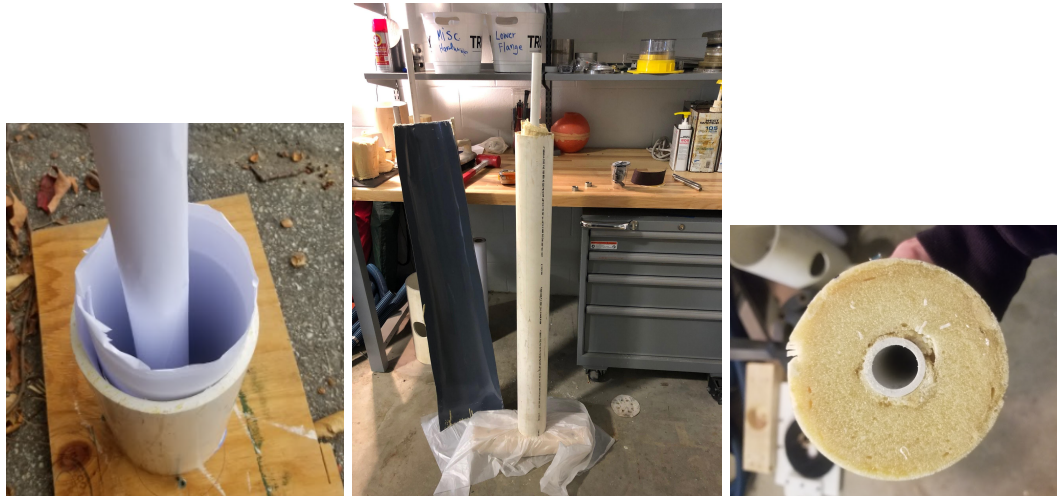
(left): The original test mold using a small piece of 4 inch PVC and a wooden dowel for the inner hole.
